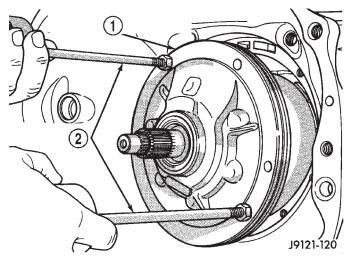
Removing Oil Pump And Reaction Shaft Support Assembly 1 – OIL PUMP AND REACTION SHAFT SUPPORT ASSEMBLY
